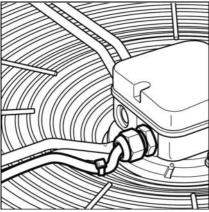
Fan installed lying flat, cable routed as a water trap.
